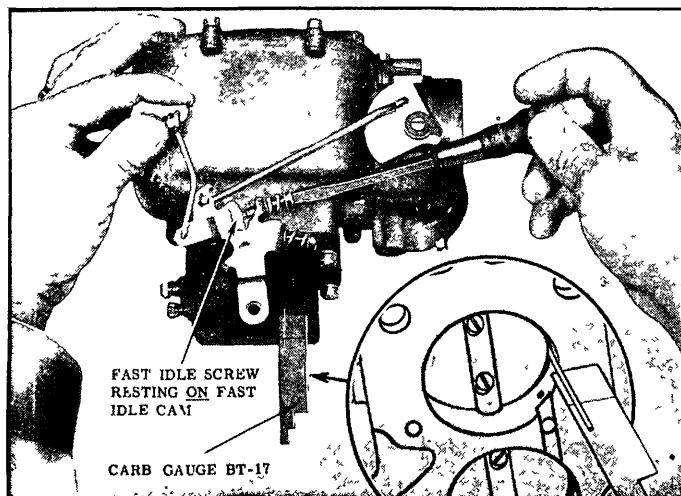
E Fast idle adjustment on Rochester Oldsmobile 1949-50 carburetor
